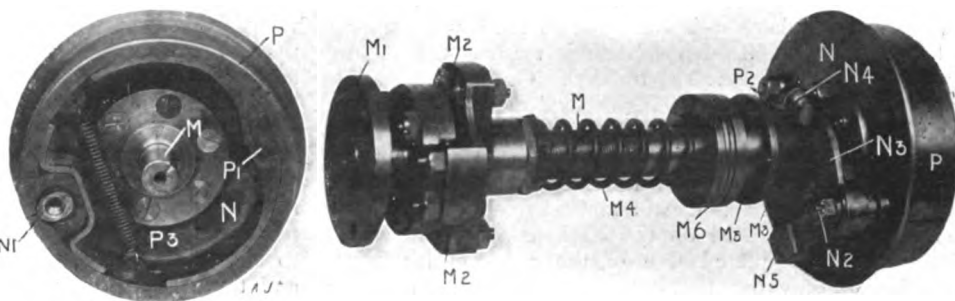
The Brooke Internal Expanding Friction Clutch. Front and side views of the inner member fitted to the clutch-shaft.
